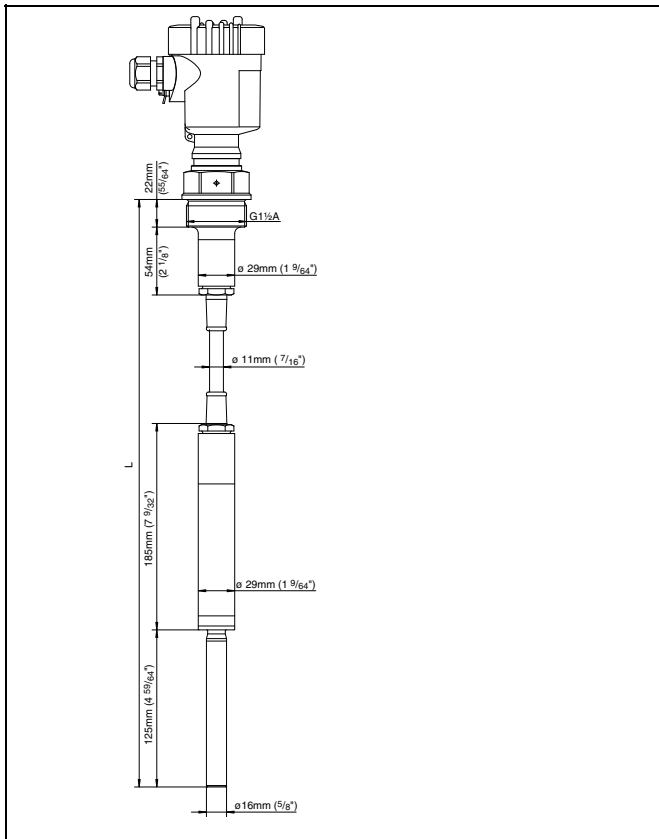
VEGA VIB 62 - threaded version G1 1/2
